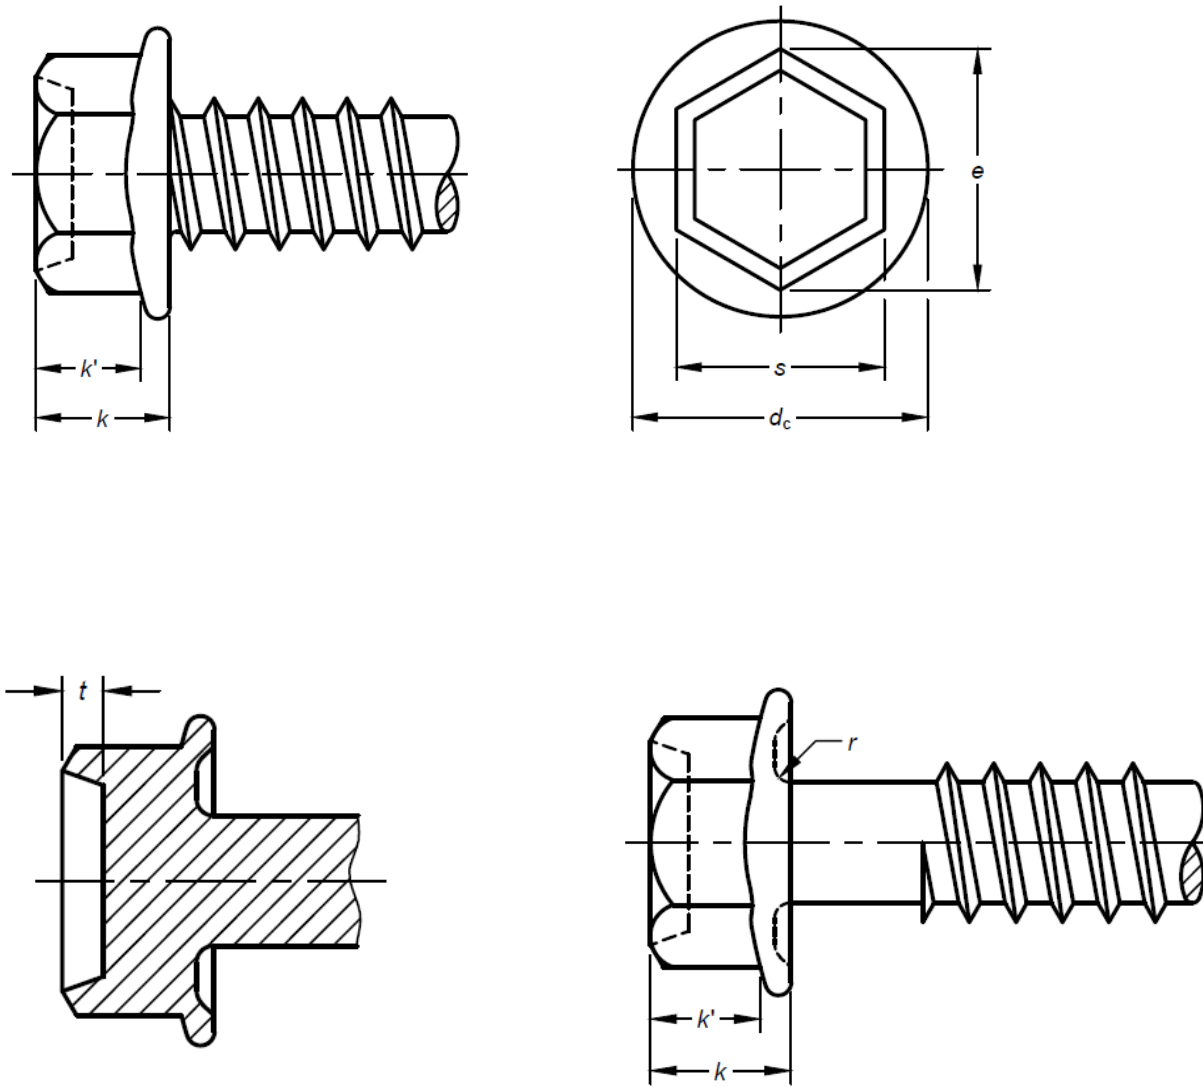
HEXAGON FLANGE HEAD DRILLING SCREW
